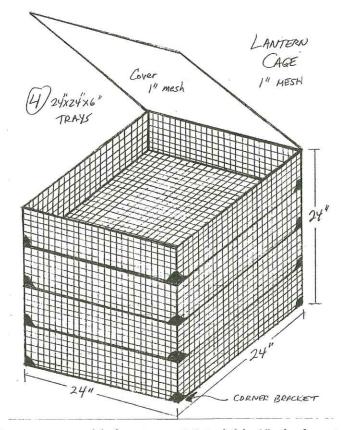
Gear diagram of lantern cage with four trays. Material is 1" vinyl coated welded wire mesh.
